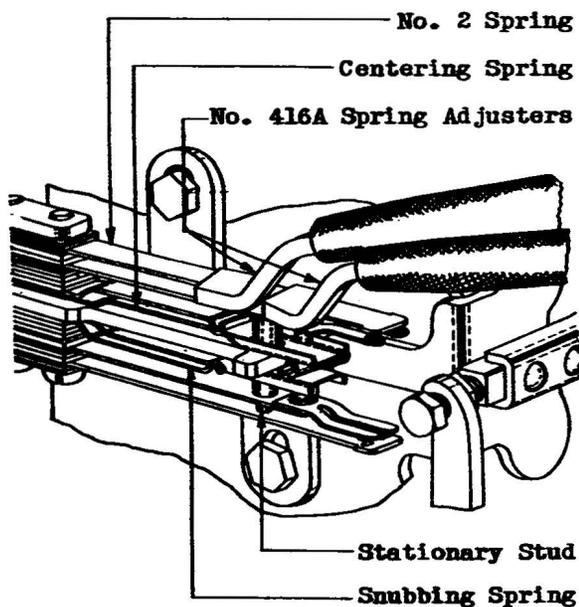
Fig. Y - Method of Adjusting No. 2 Spring for Contact Separation and Front Contact Make
